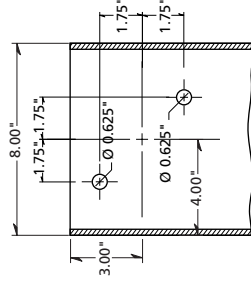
DETAIL POST ASSEMBLY 6 x 4 FRONT ELEVATION
